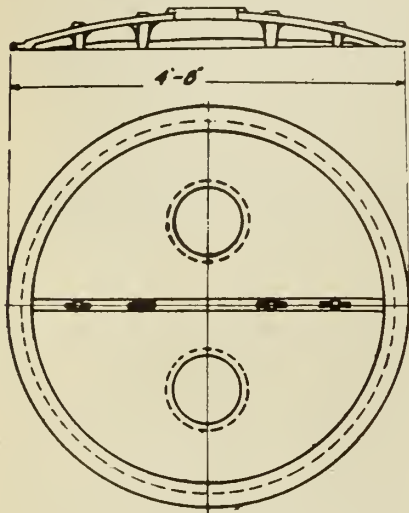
PLAN AND CROSS SECTION ELEVATION.
